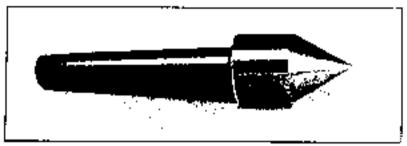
Male Center "The" diameter, 60° included angle, shank Rivett special 3" taper. Furnished hard for tailstock and soft for headstock
